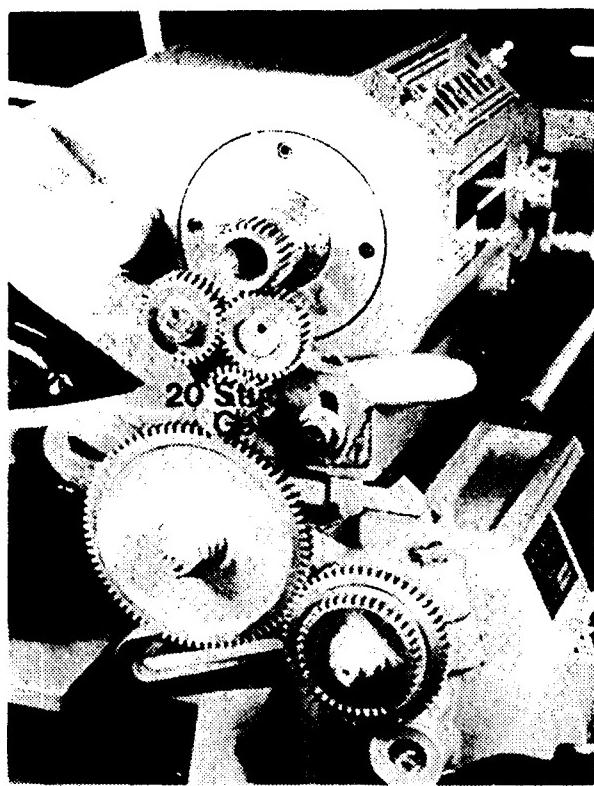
Bench Model Lathe with Gearbox Set Up for Normal Feeds and Pitches (e.g. 8 to 224 T.P.I.)
